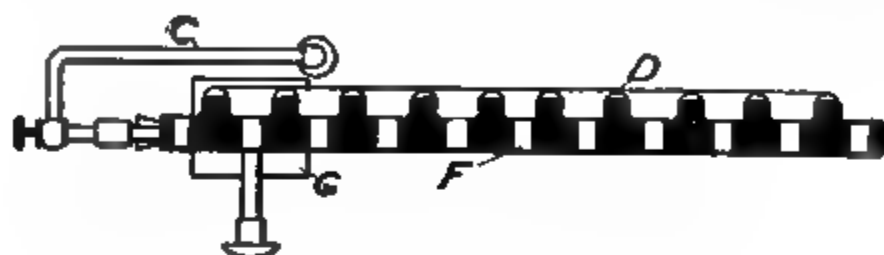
Plan and Sectional Elevation of the White Burner.
